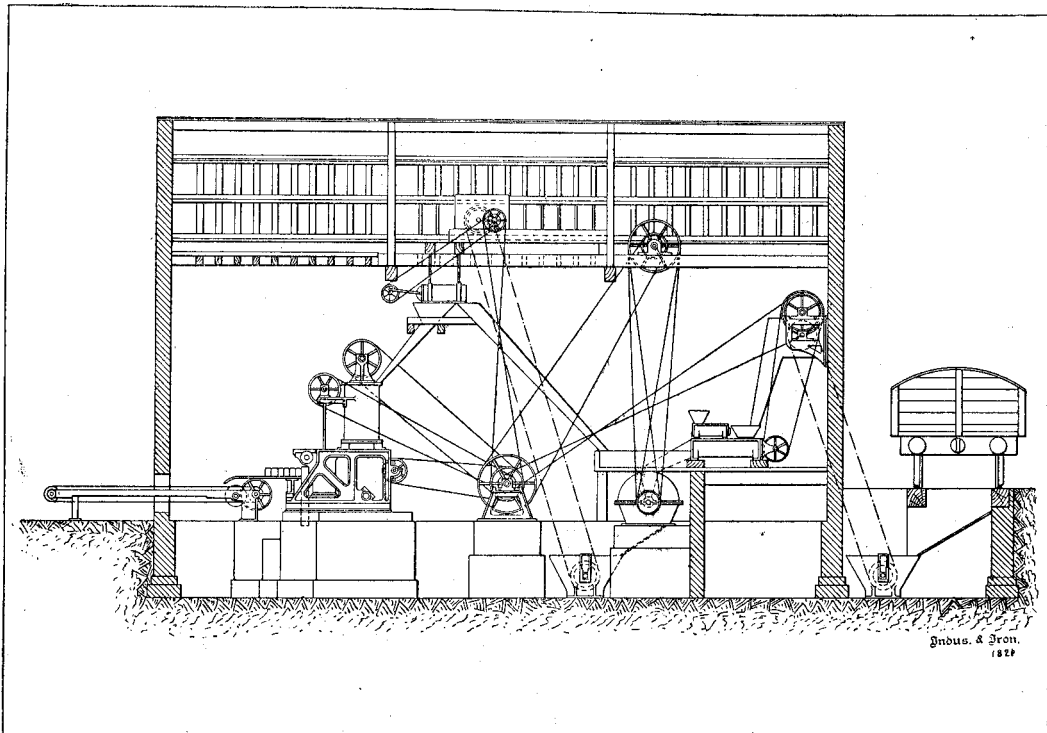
Section showing arrangement of Middleton's briquette plant.
